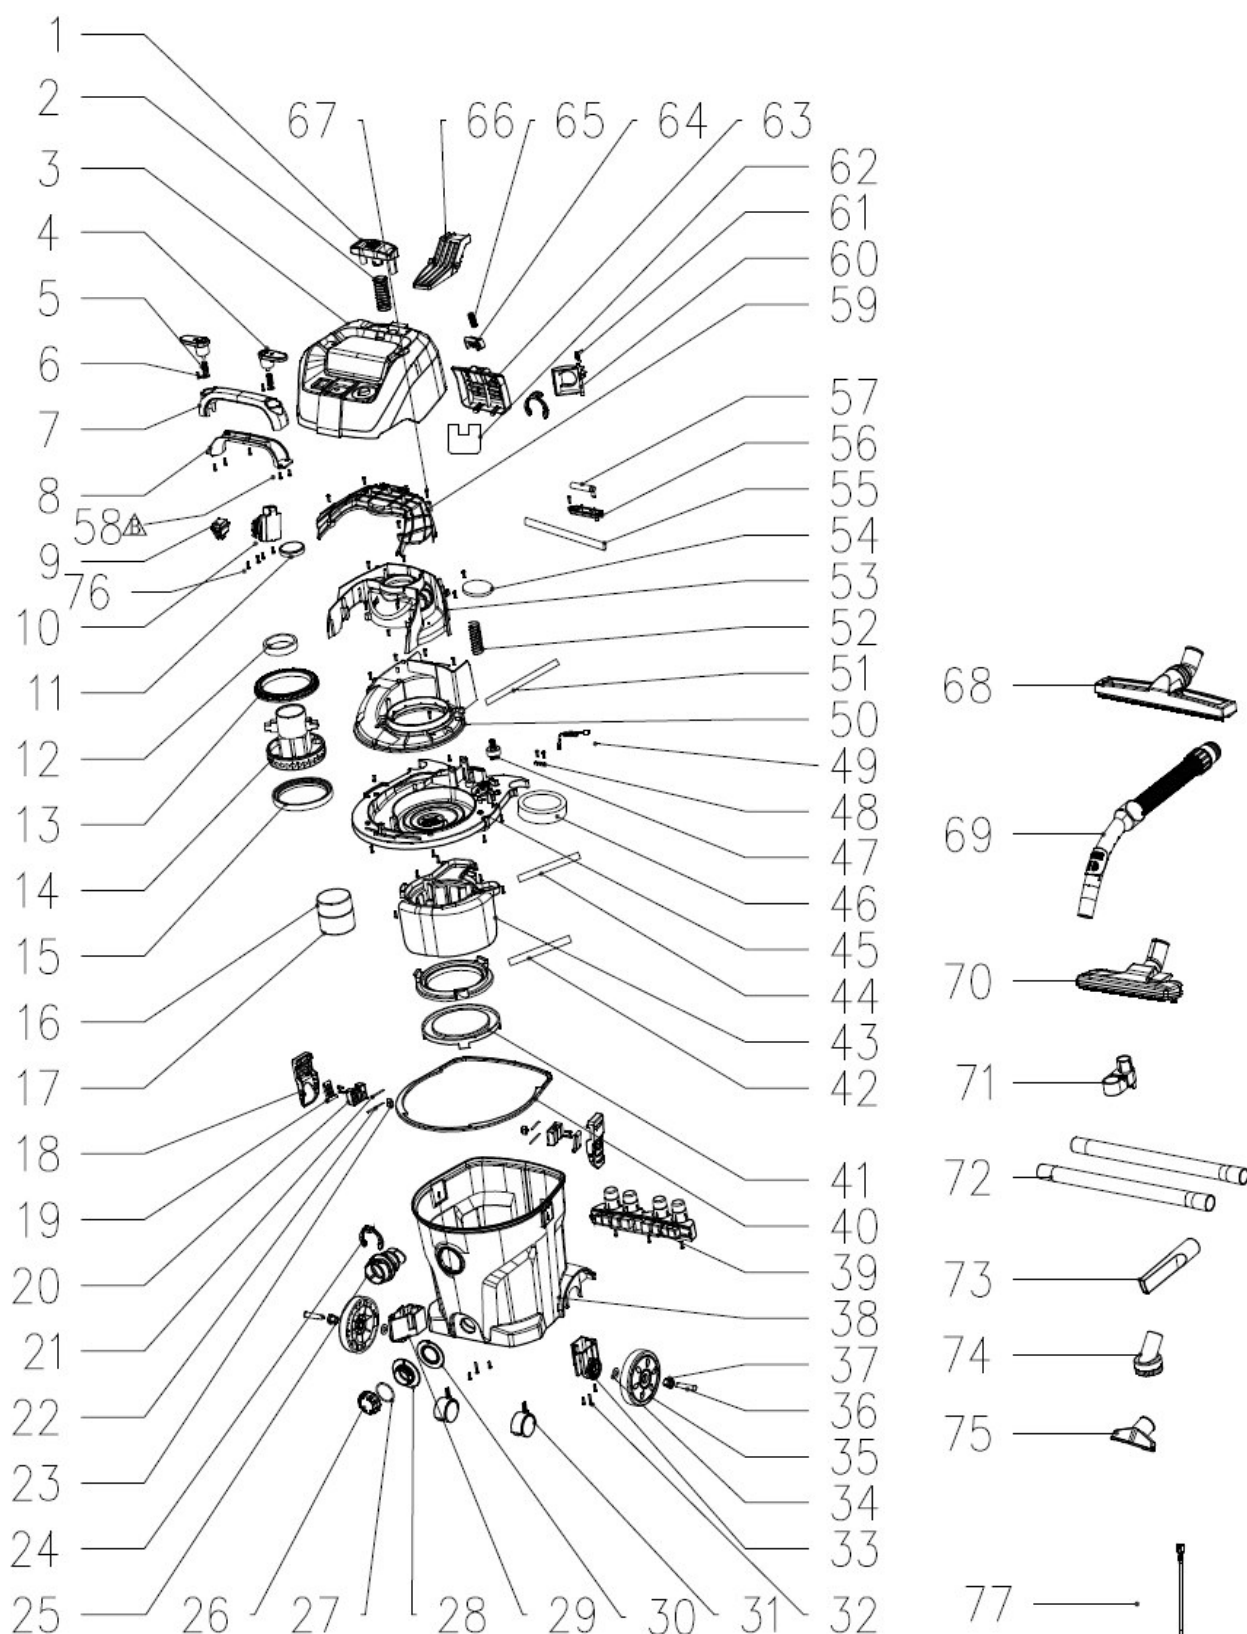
Spare parts drawings of the vacuum cleaner wetCAT 120 RH
